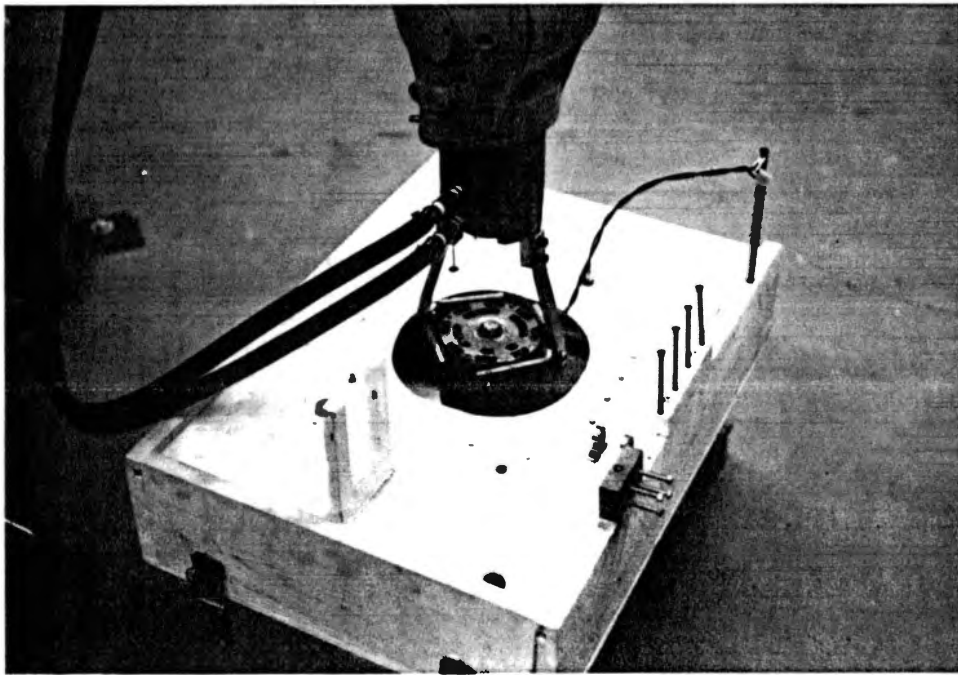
Robot Placing End Bell onto Shaft and Front Bell
